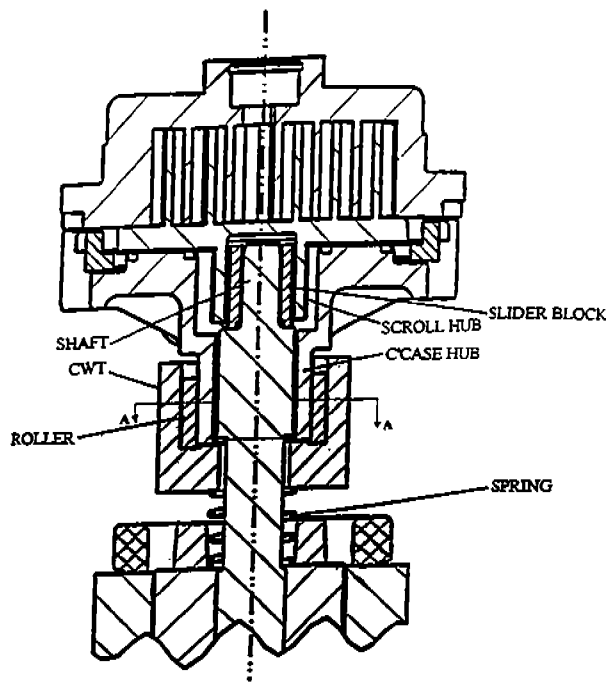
Scroll Compressor Assembly Layout with Anti-rotational Roller Clutch Device
